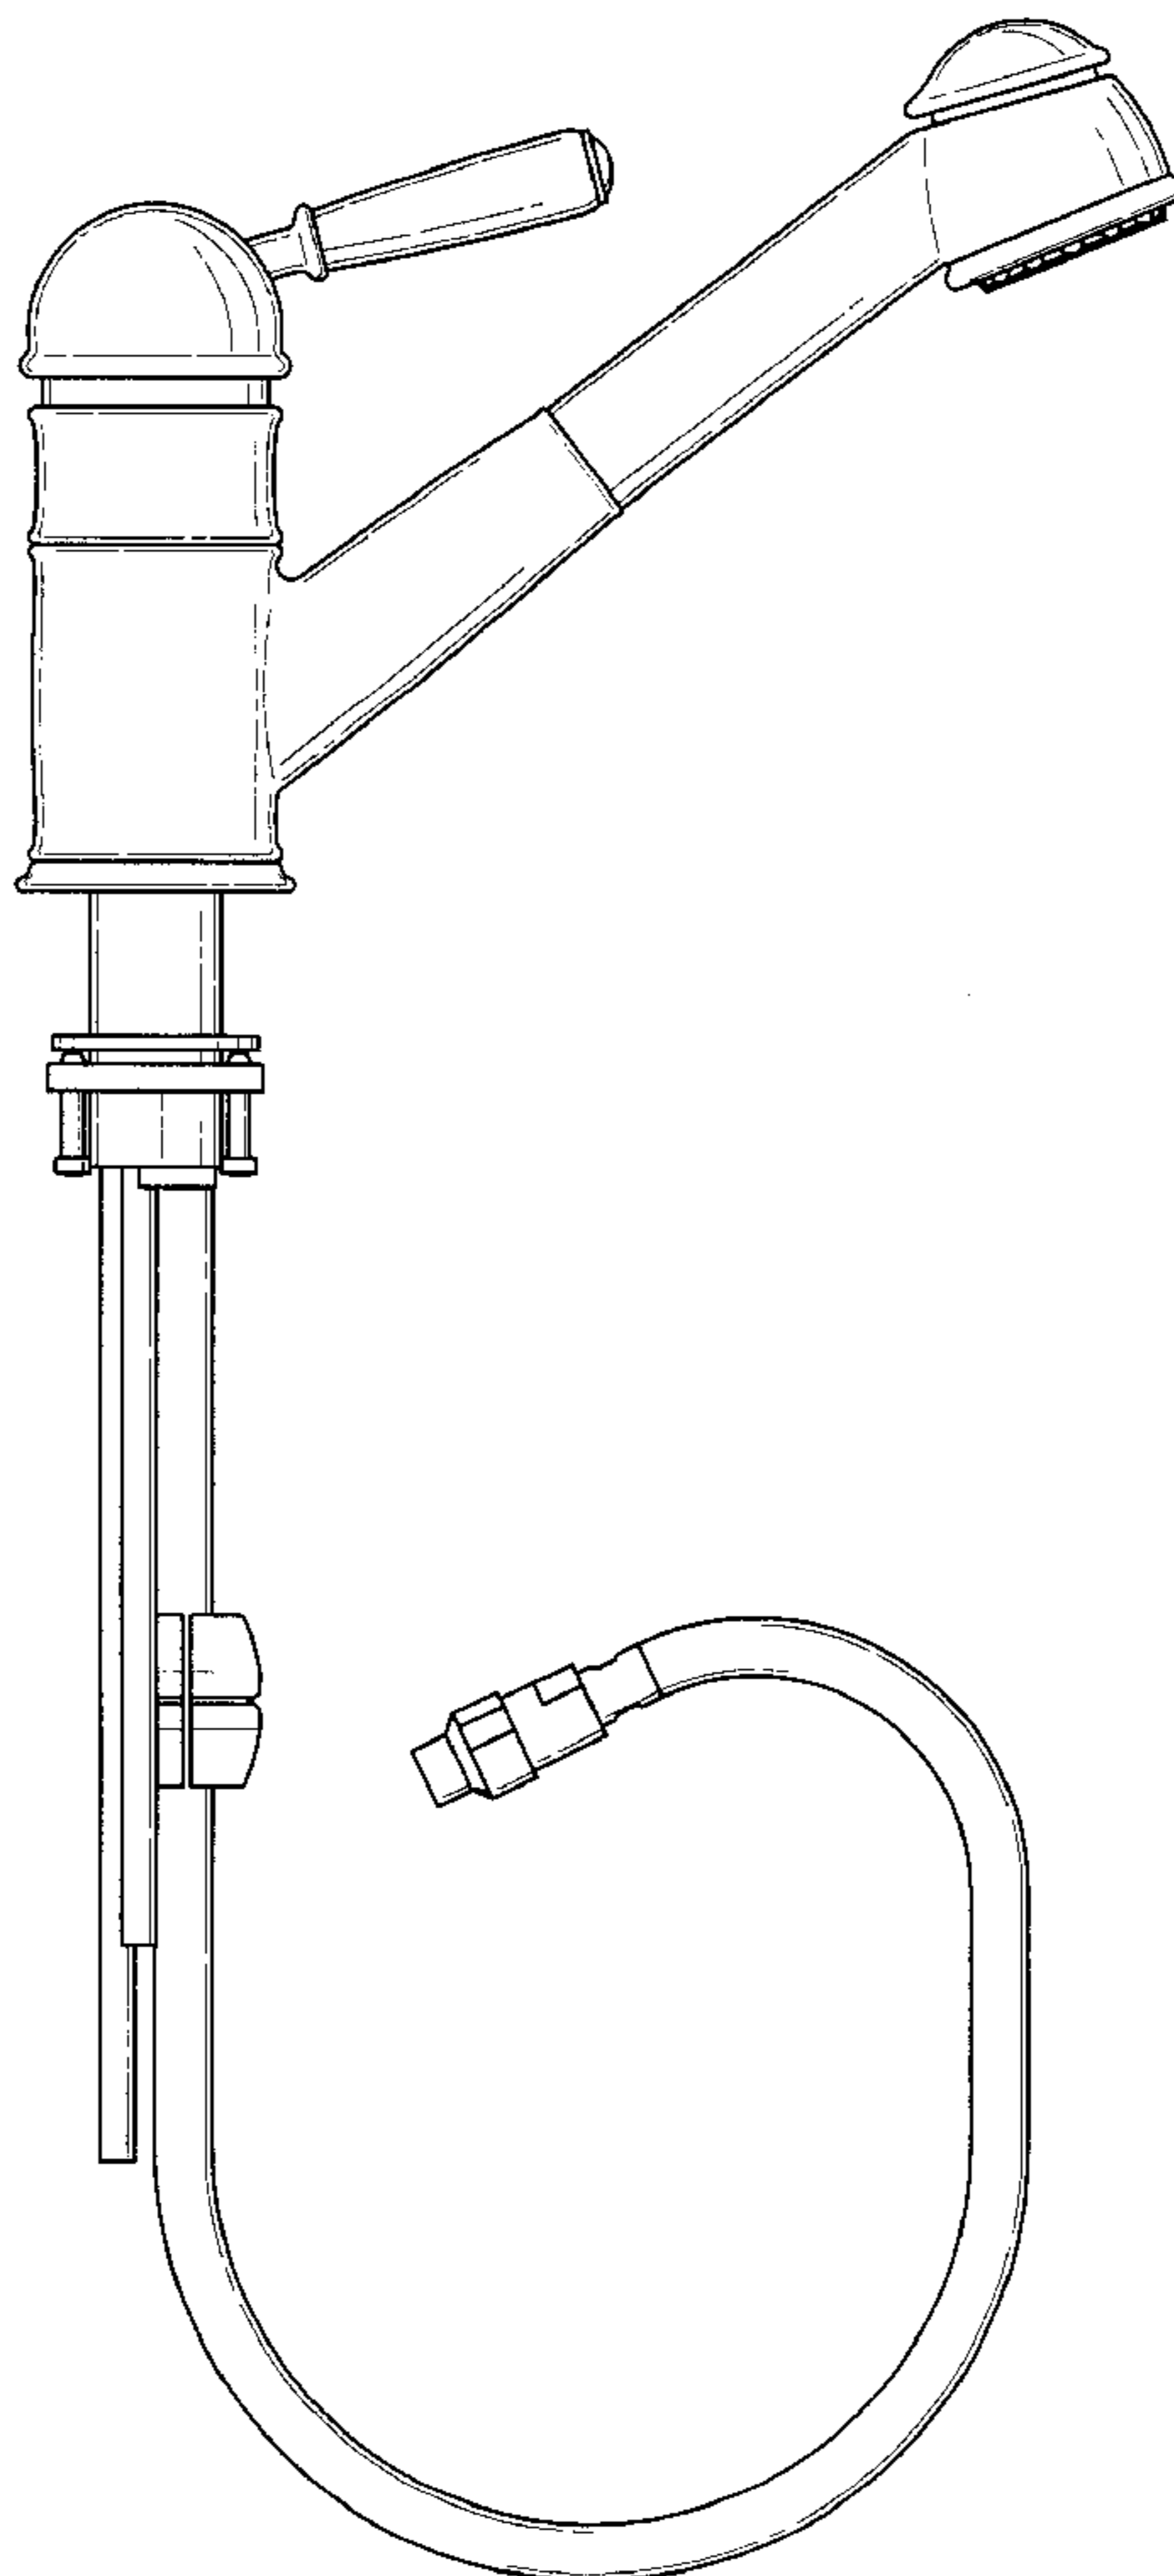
is a rear view of an faucet assembly having a unique configuration of the present design;
